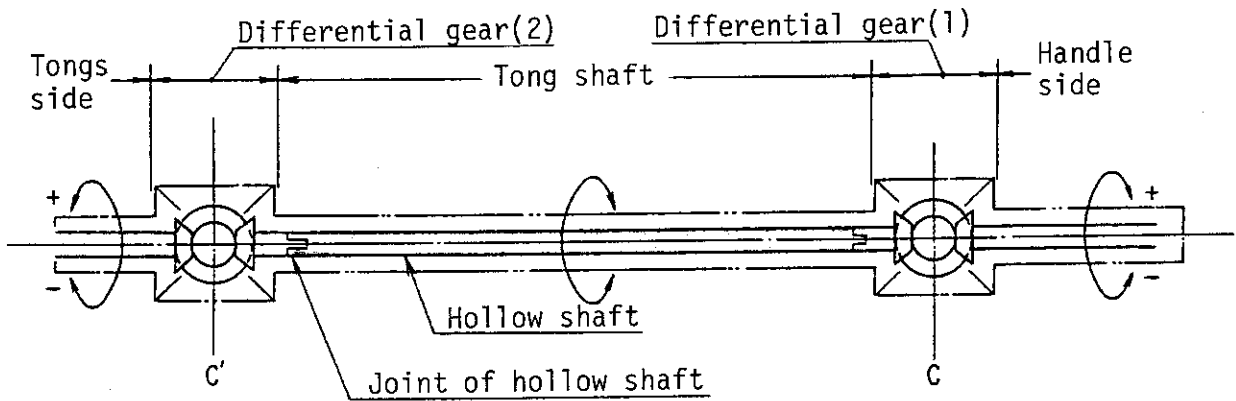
Handle rotation mechanism of the type A 15 ball-socket tong manipulator
